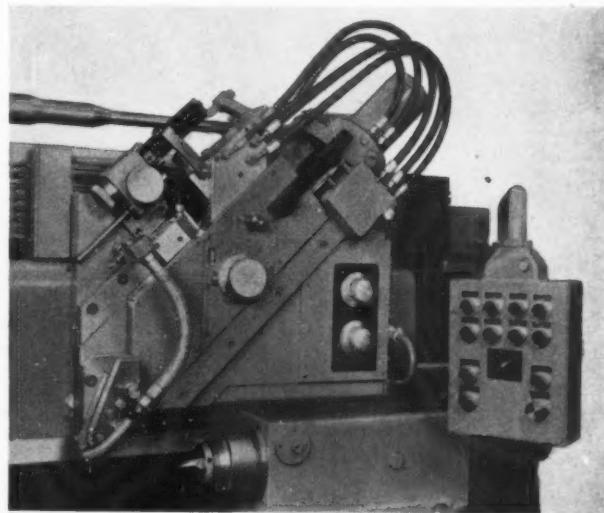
Close-up View of the Profiling Saddle on the Churchill-Redman P5 Lathe. A Cylindrical Master is Seen in Position, but Flat Templates may be Used
